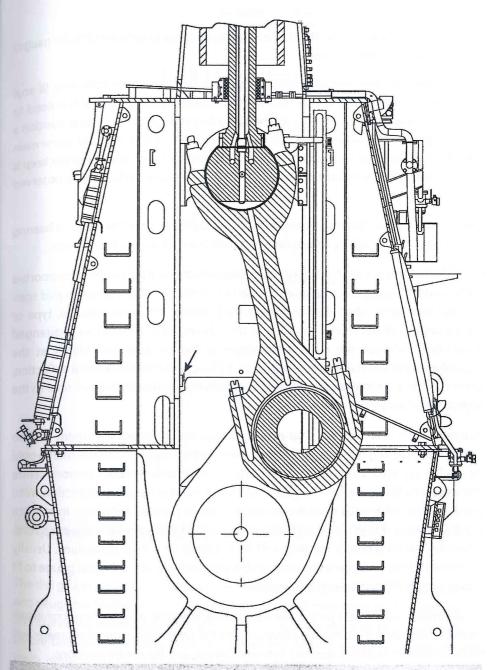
Position of bearing wear sensor (shown by the arrow)
